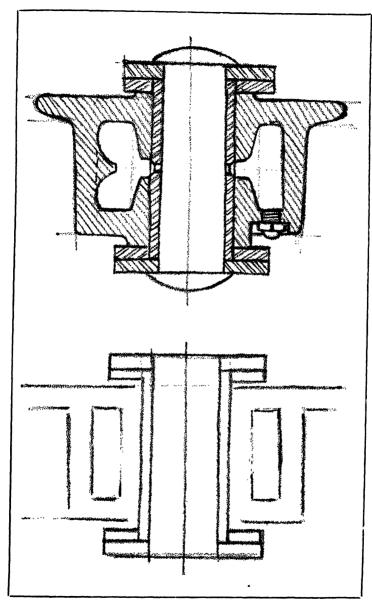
The Third and Final Stages in Sketching a Self-lubricating Conveyor Wheel
